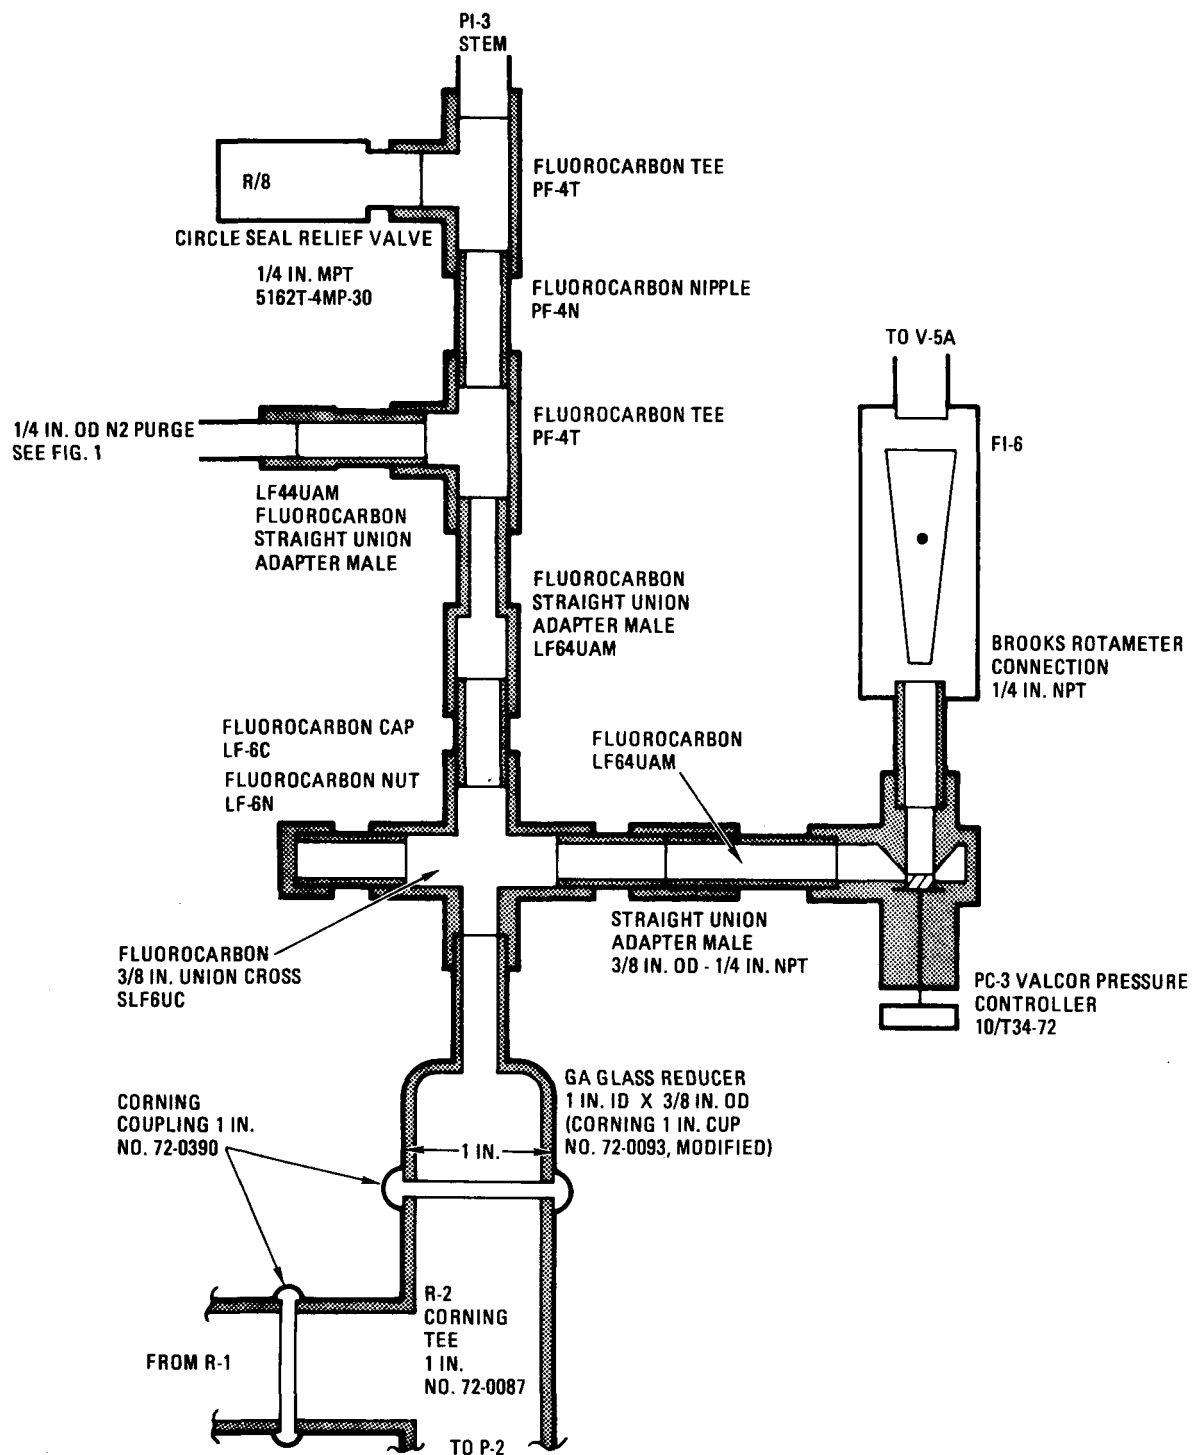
Gas-liquid phase separator R-2 upper assembly
